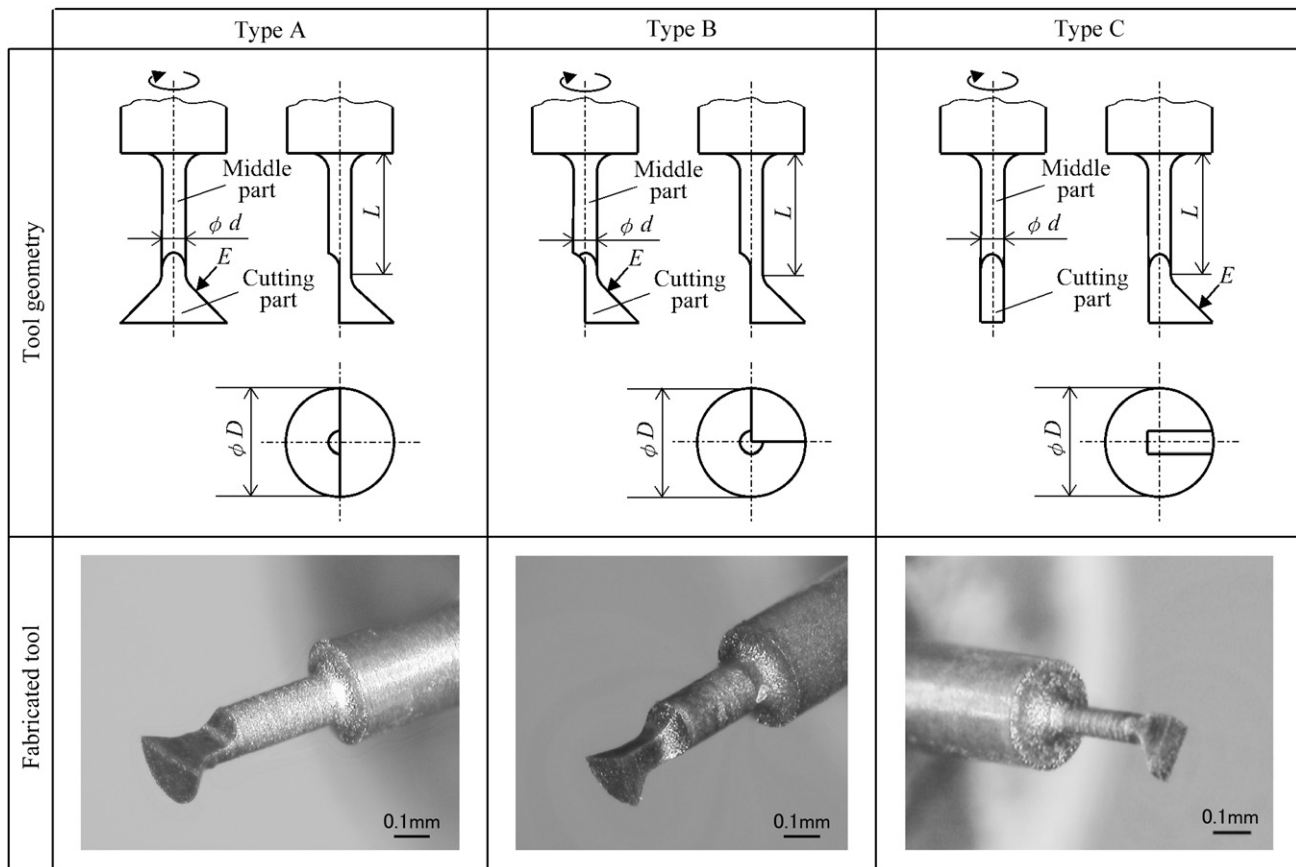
Tool geometries and fabricated micro-cutting tools.
